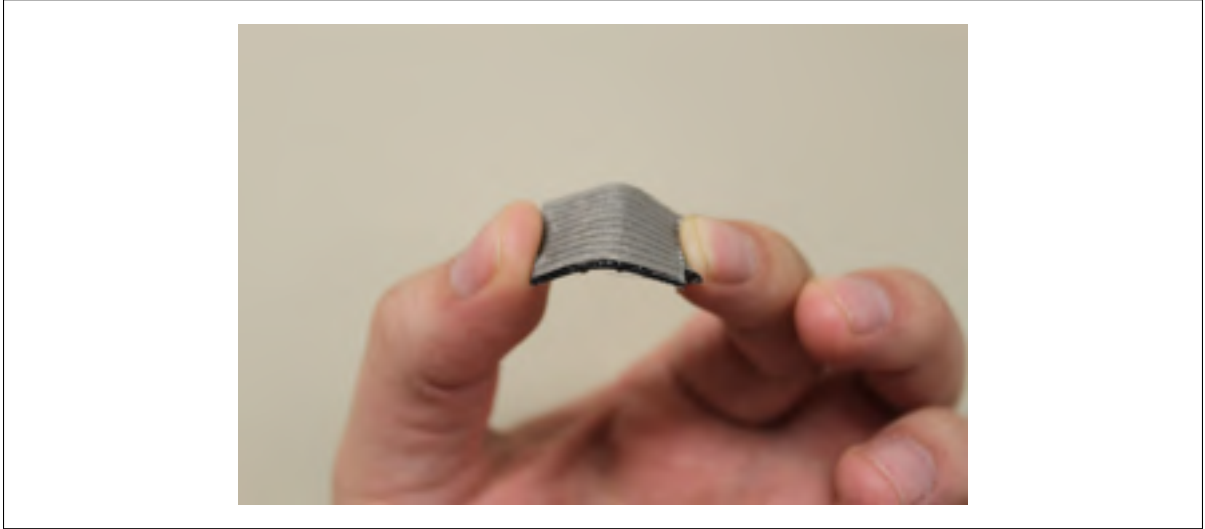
Fabricated layers of the sensing element, before the PCB was added
